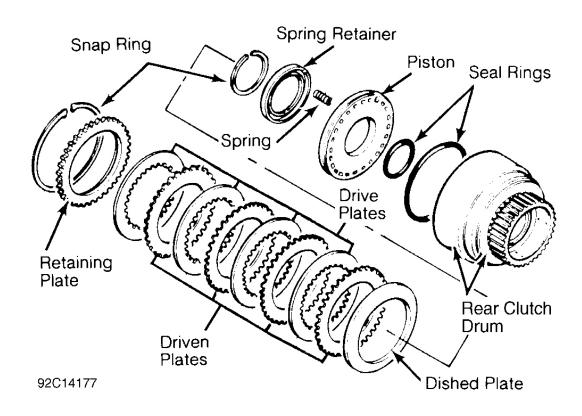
Exploded View Of Rear Clutch Courtesy of FORD MOTOR CO.
